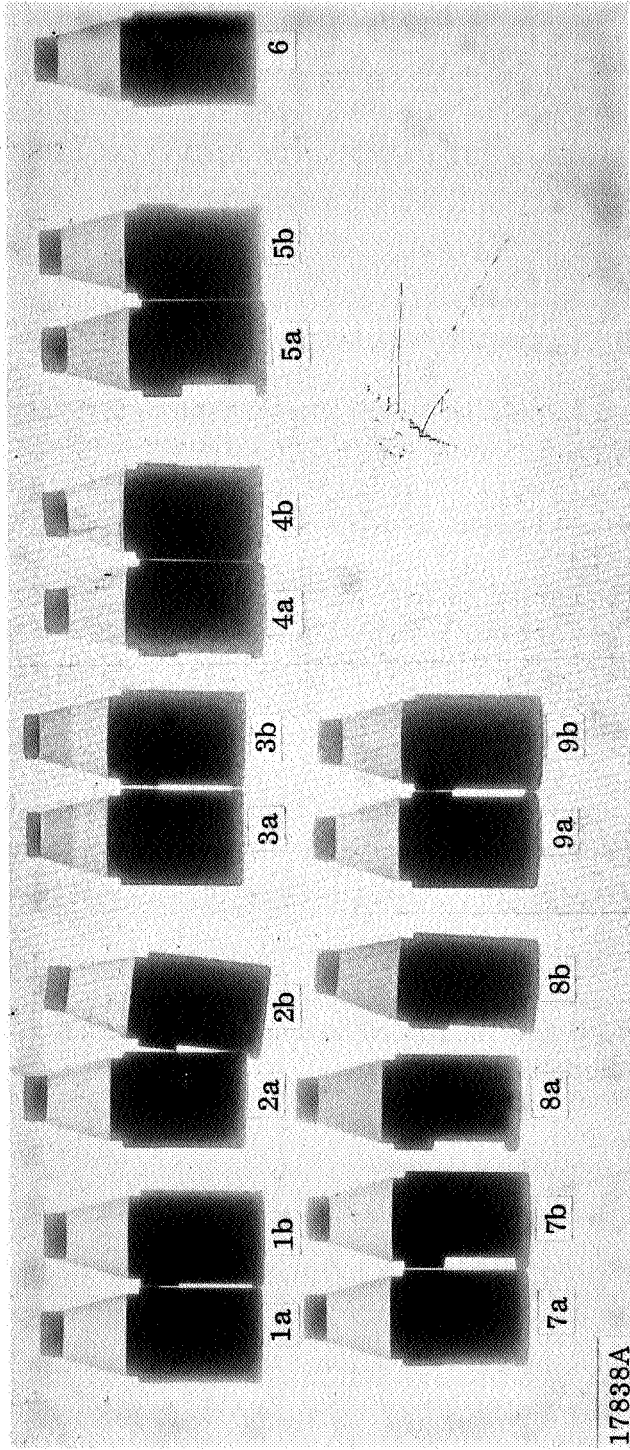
Radiograph of WJ-398 cathode cone assemblies after shock tests.
